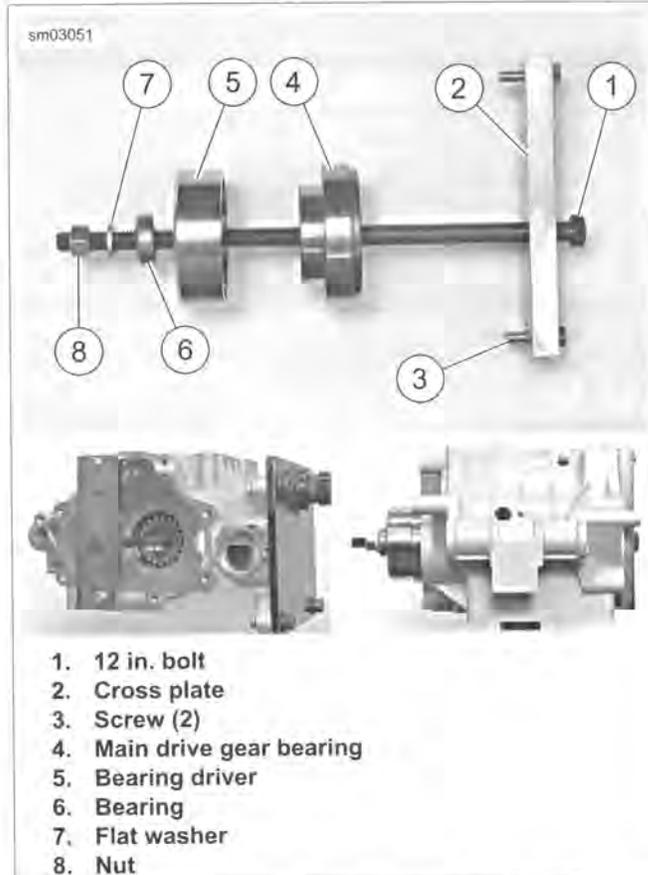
Installing Main Drive Gear Bearing (Typical)
